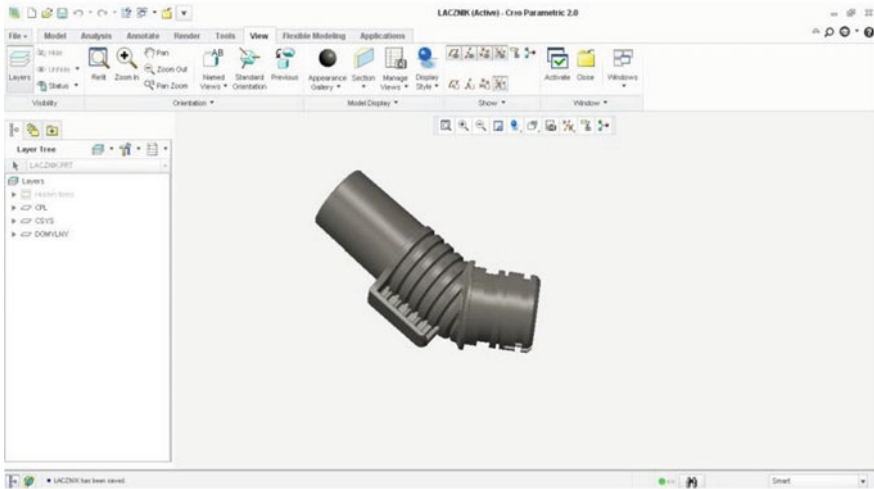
Surface CAD model of a connector for the vacuum cleaner
